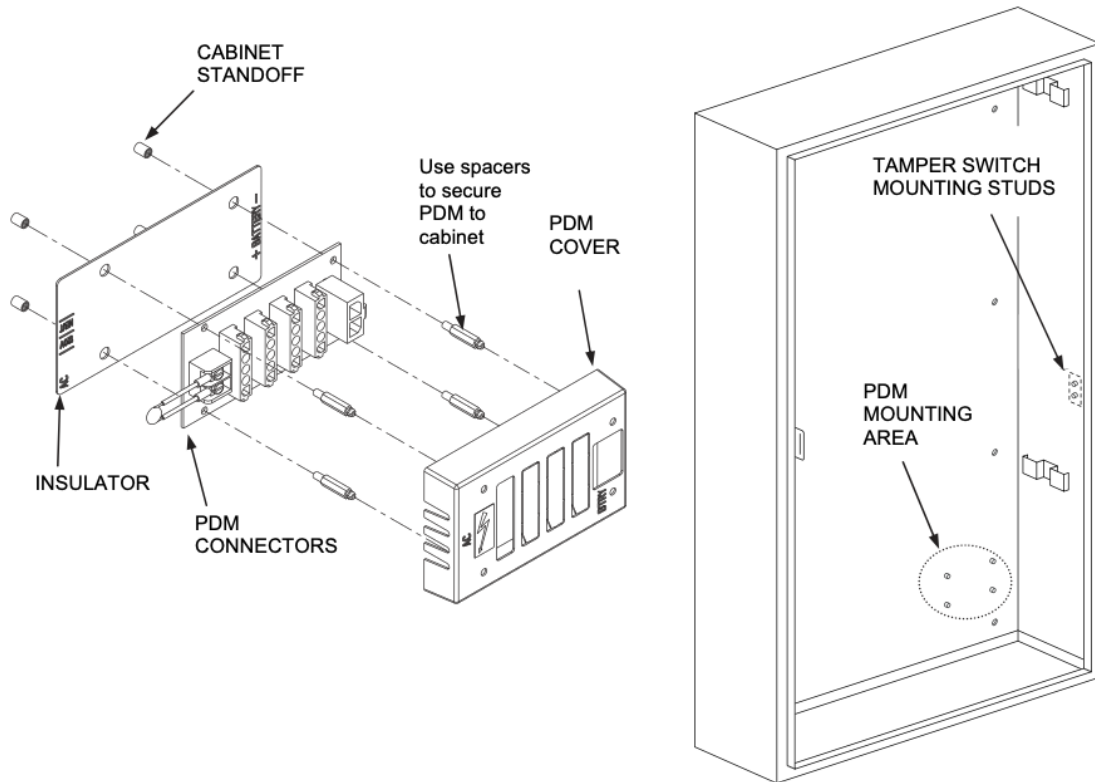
Mounting the PDM (2-Bay Box Shown)
